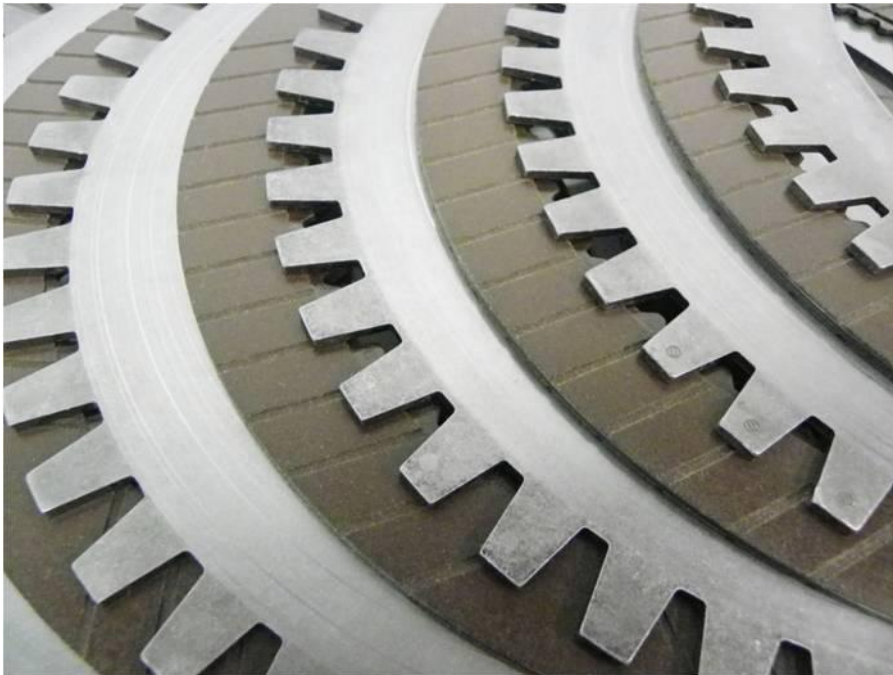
TEST Transmission C5 Clutch Assembly (Close-up)
